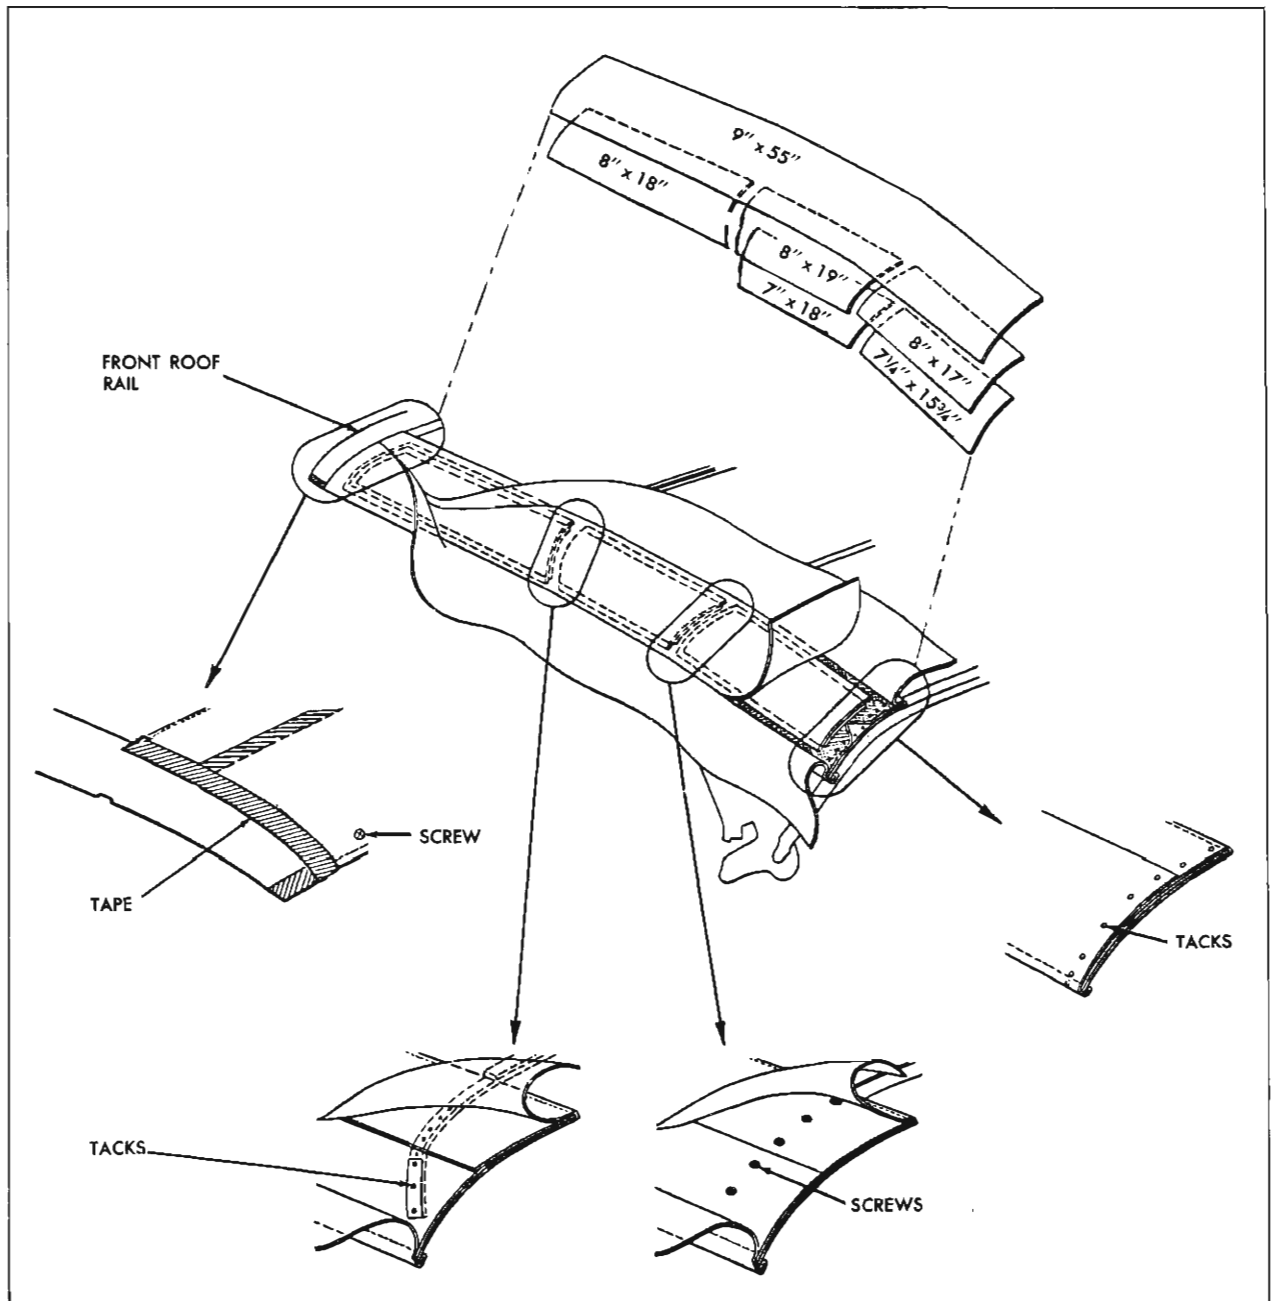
Installation of Side Stay Pads (Tempest Styles)
